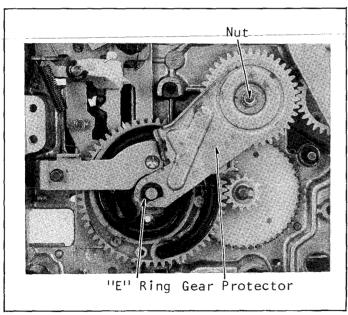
Adjustment of Cam Gear and Mode Select Switch - (6)
